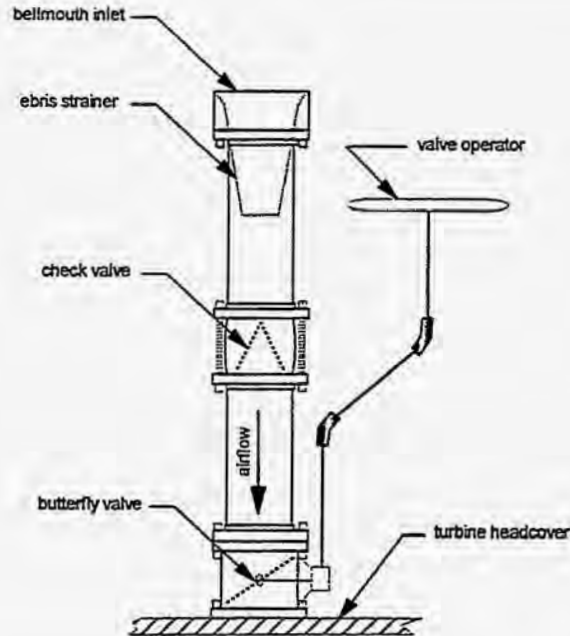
Typical Arrangement for Bypass Conduit
